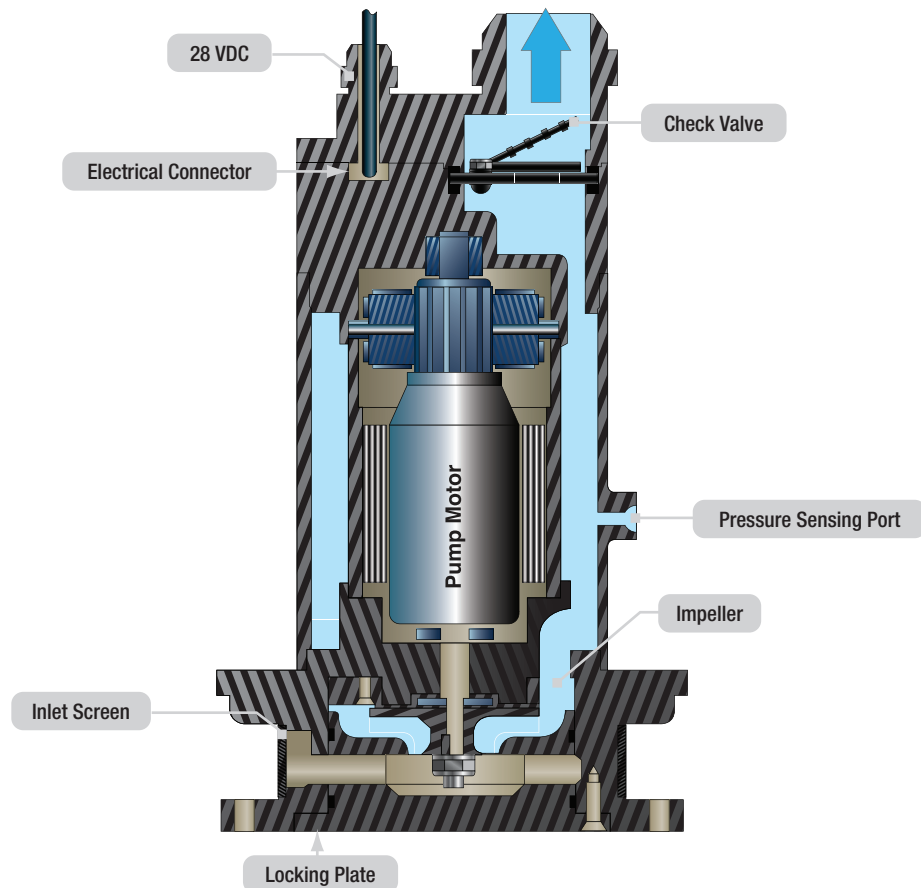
The internal workings of a centrifugal fuel boost pump. Fuel is drawn into the center of the impeller through a screen. It is moved to the outside of the case by the impeller and out the fuel outlet tube.
